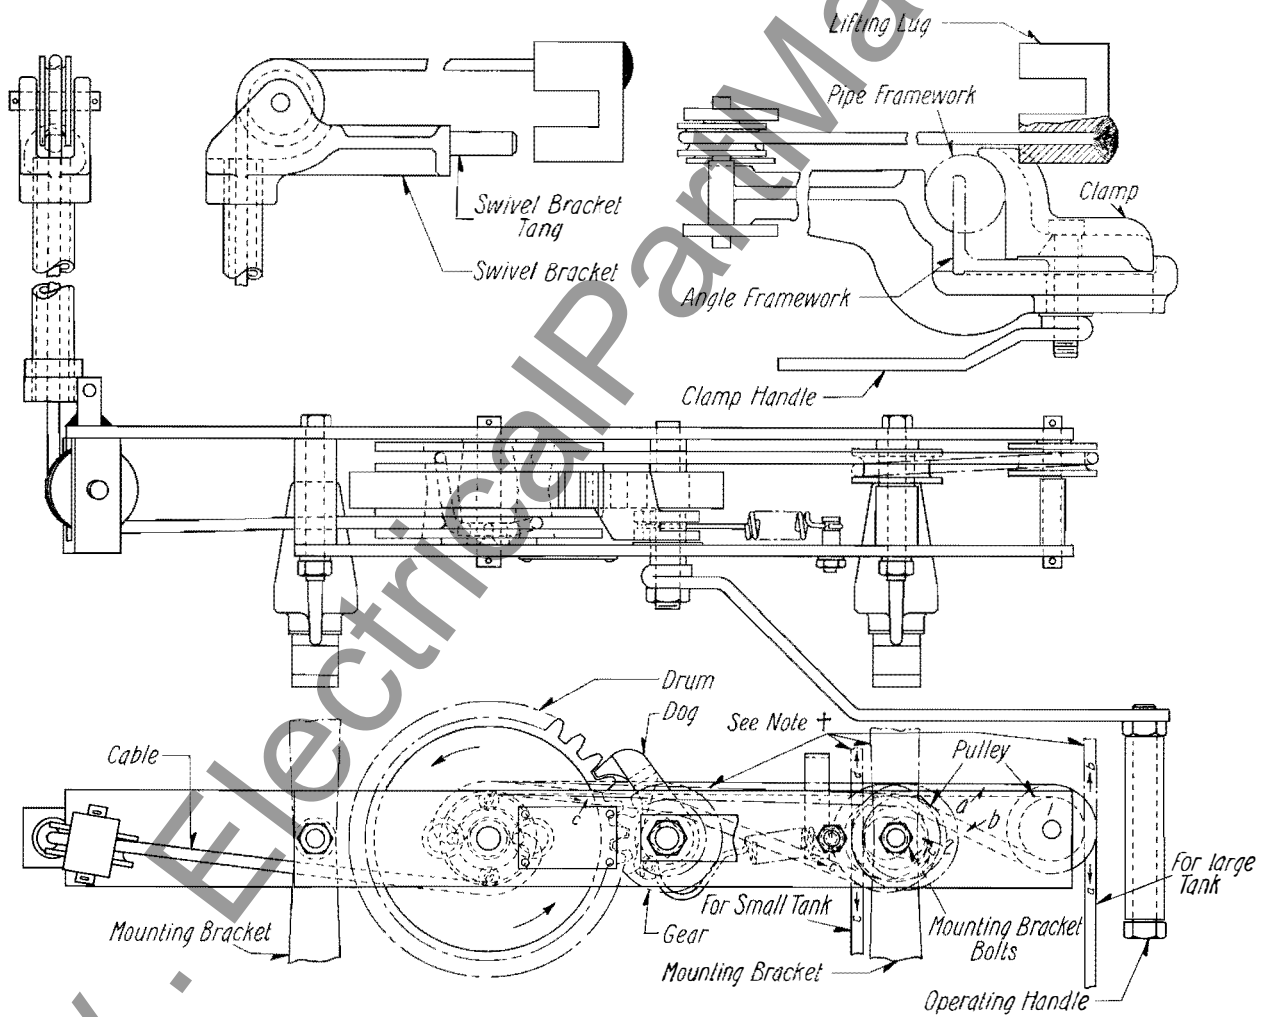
METHOD OF ENGAGING TANK AND LIFTING LUGS
